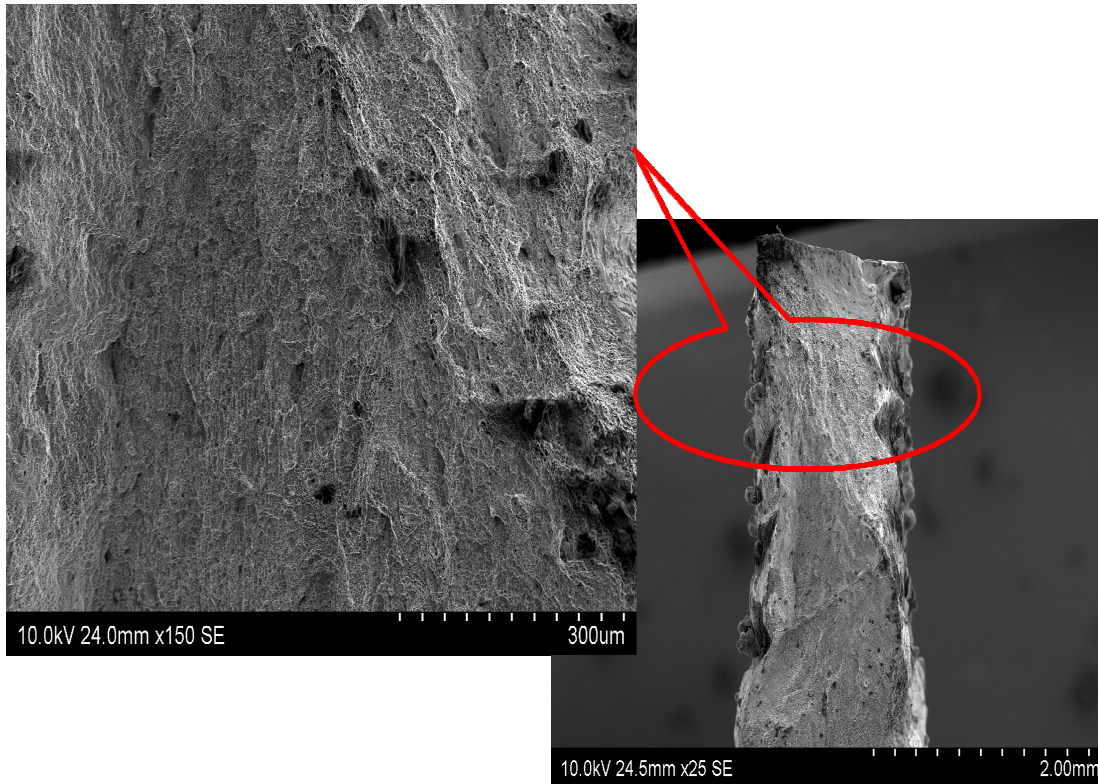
Fractured surface of sample 1 with enlarged view of the surface
